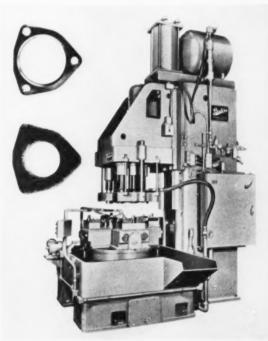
Colonial special machine equipped for rapid broaching of bearing caps
